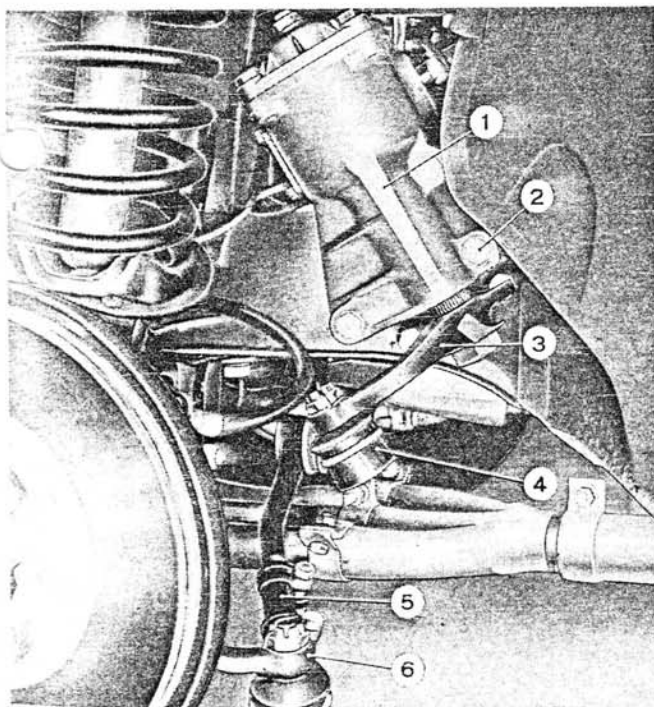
Detail of steering gear and linkage fitted to the vehicle.
